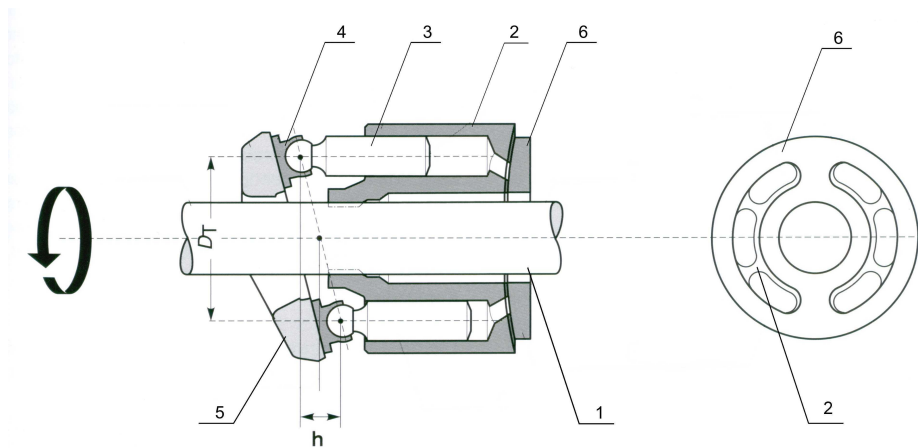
General scheme of the axial multi-piston pump: 1 – shaft, 2 – cylinder block, 3 – piston, 4 – piston shoe, 5 – swash plate, 6 – valve port plate,
